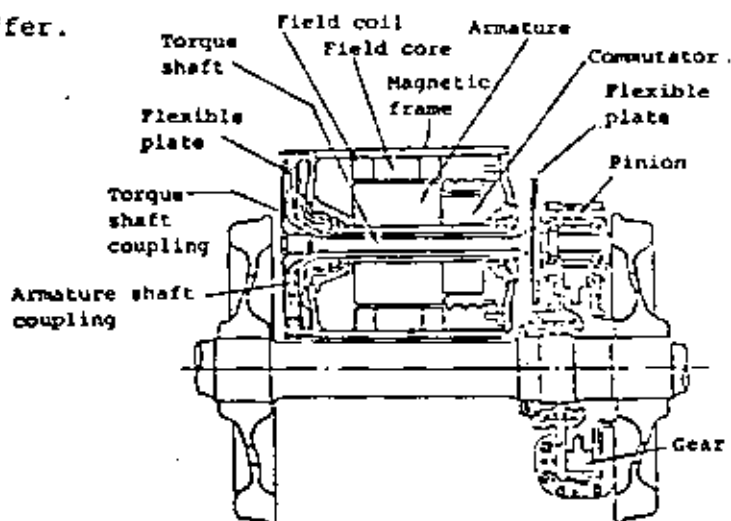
Traction Motor and Hollow Shaft Parallel Cardan Type Driving Gear
